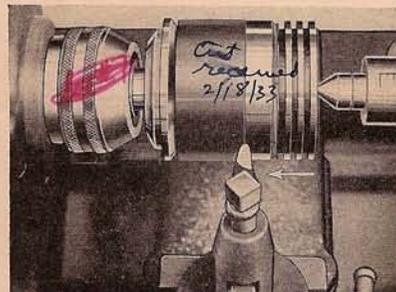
Finishing a Semi-Machined Cast Iron Piston Mounted on the Piston Adapter.
